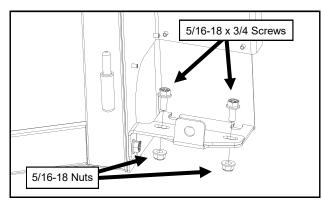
(Rear Mount to Rear Bracket Fasteners)
